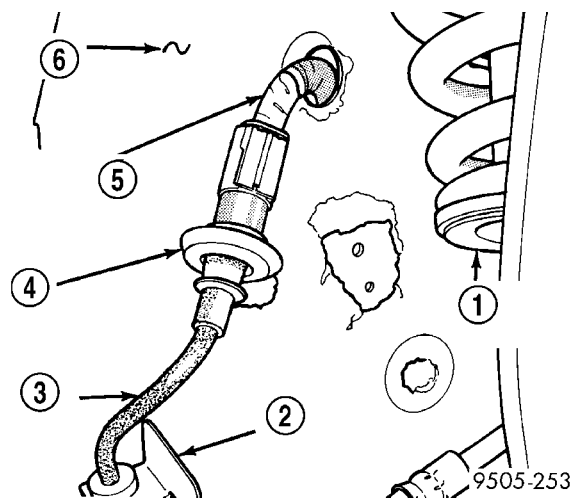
Wheel Speed Sensor Connection To Vehicle Wiring Harness
